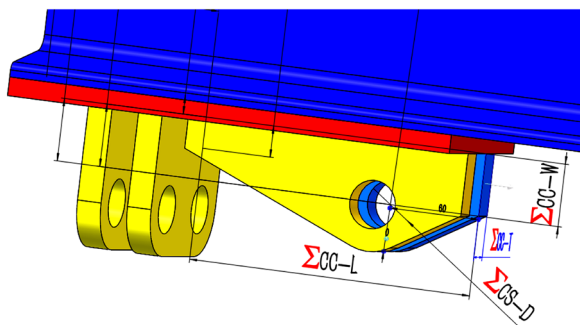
Schematic diagram of structural design parameters of beam connecting plate
